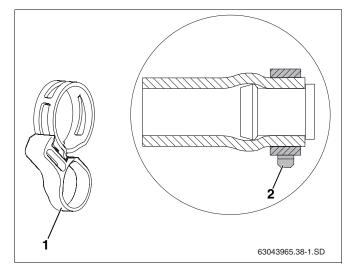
Hose clip with locking ring, also shown fitted to the pre-assembled dummy plug
